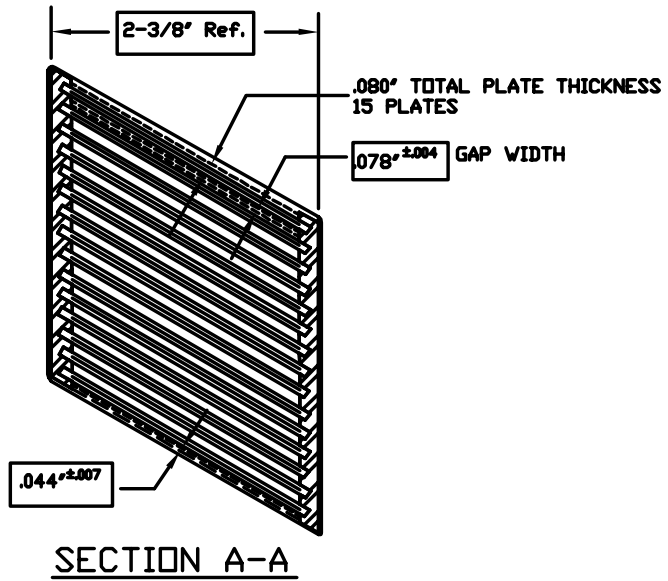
Engineering drawing of MITR-II HEU fuel element cross-section [11]
